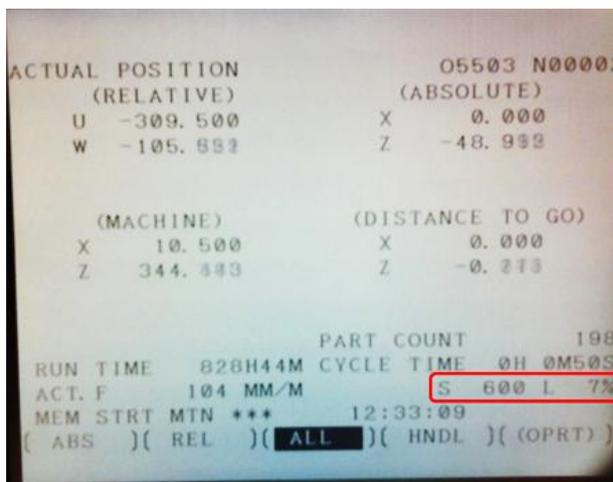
Photographic view of CNC machine FANUC system output screen display
